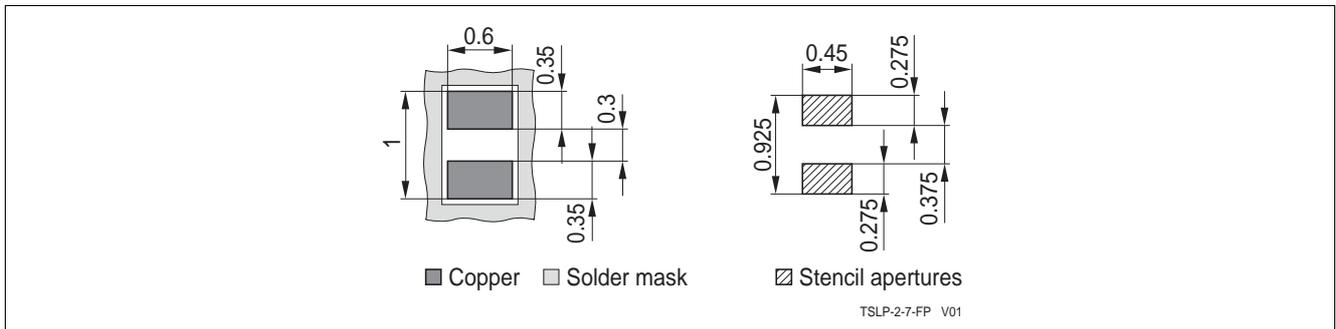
TSLP-2-17 Footprint (dimension in mm)
